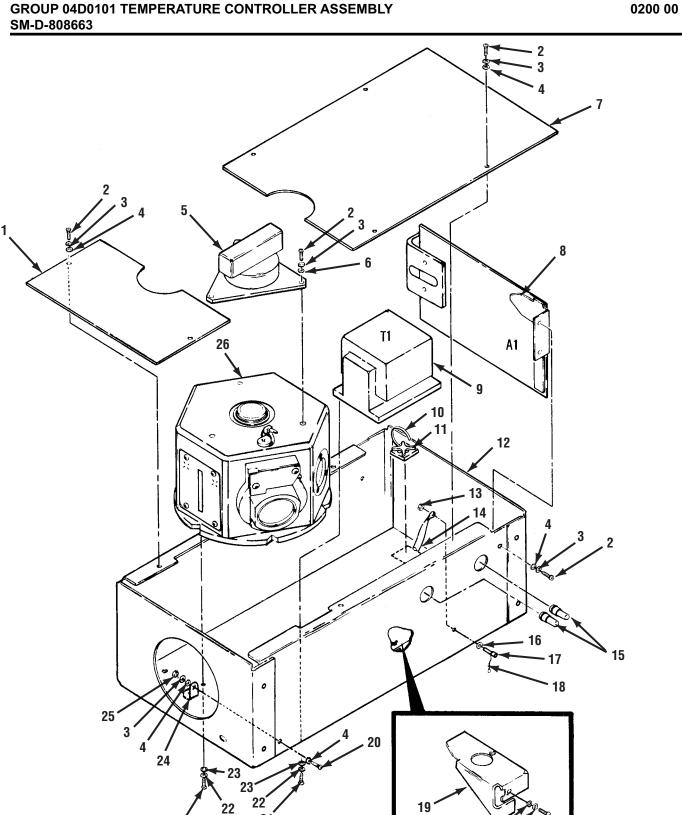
Group 04D0101 Temperature Controller Assembly SM-D-808663 (Sheet 1 of 2)
